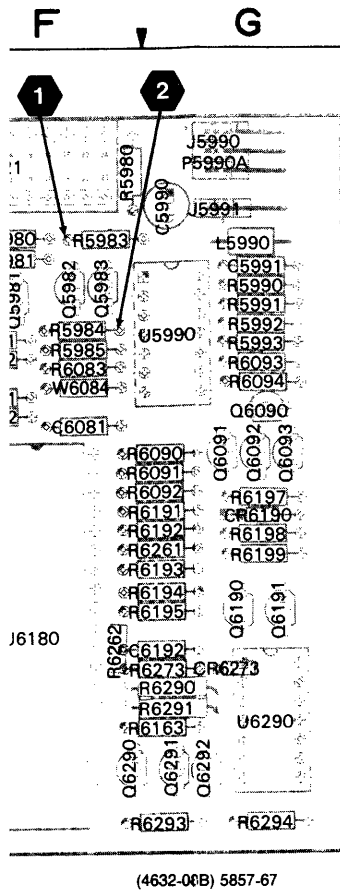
A27—Counter/Timer/Trigger Board. (For instruments with serial numbers: 2467: B011185 & below; 2465A: B015745 & below; 2445A: B012556 & below.)
